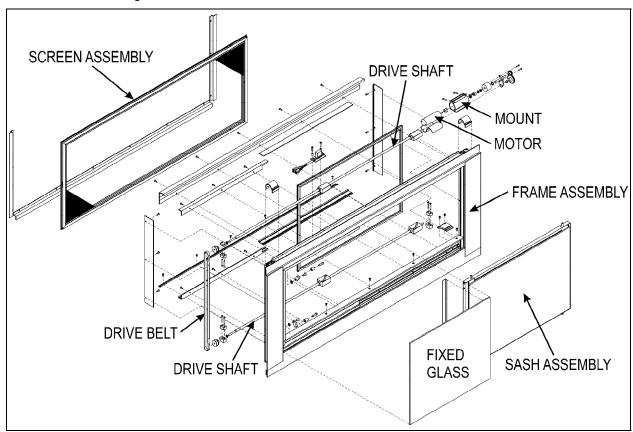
ELECTRIC SLIDING WINDOW EXPLODED VIEW
